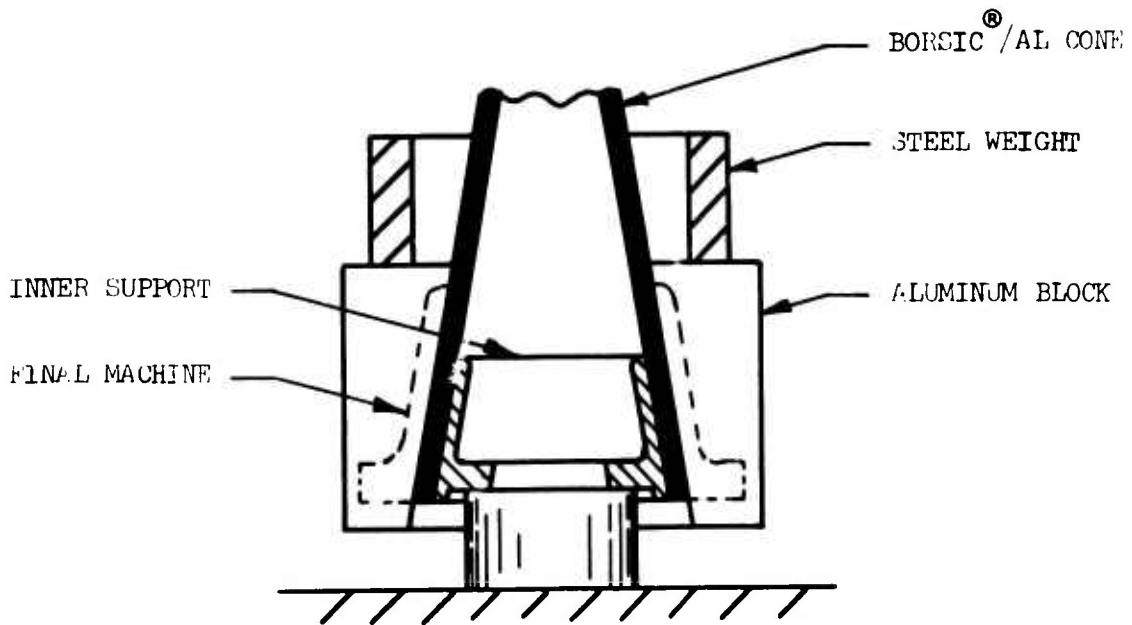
Braze Bond Fixture for Bonding Aluminum Components.
